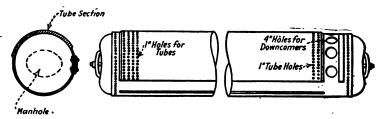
Mud Drum in Detail, White-Forster Boiler
